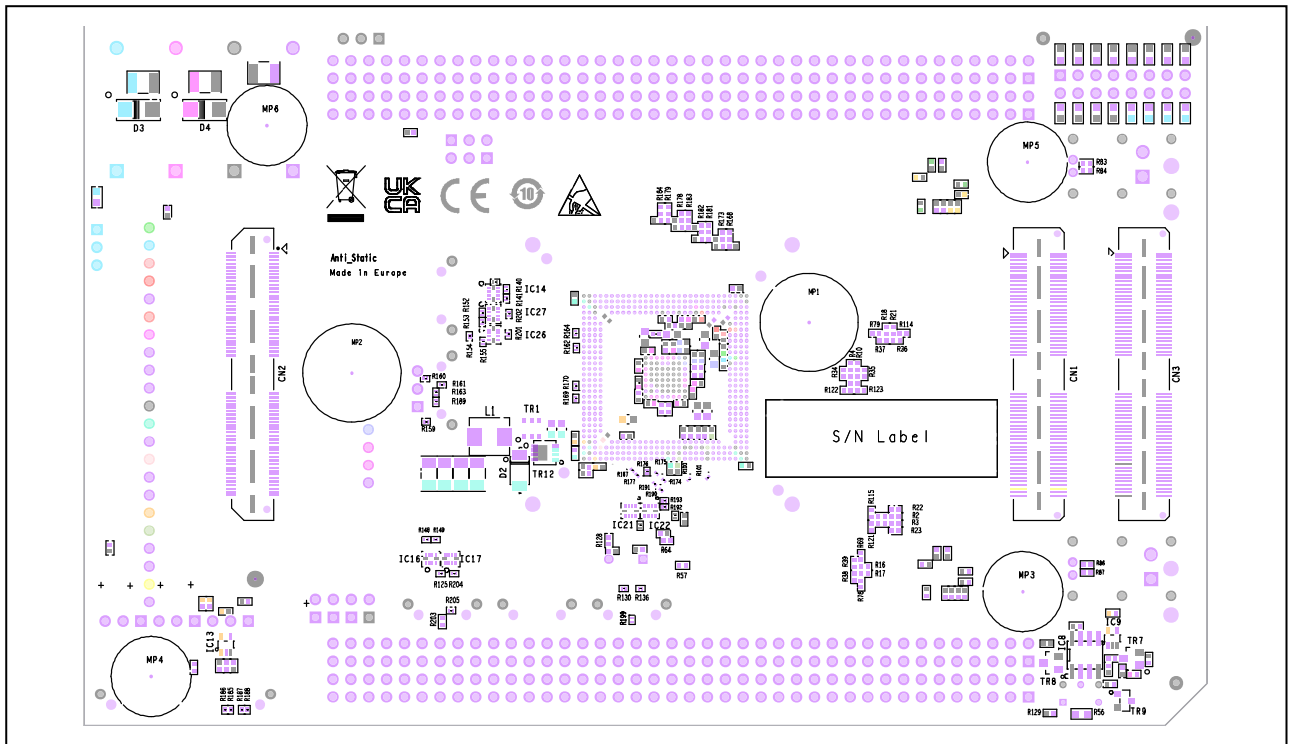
D018177_06_V02 Piggyback Board bottom view
